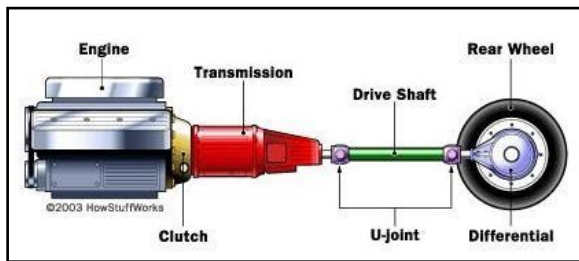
Advanced one piece composite drive shaft for rear wheel drive vehicle
